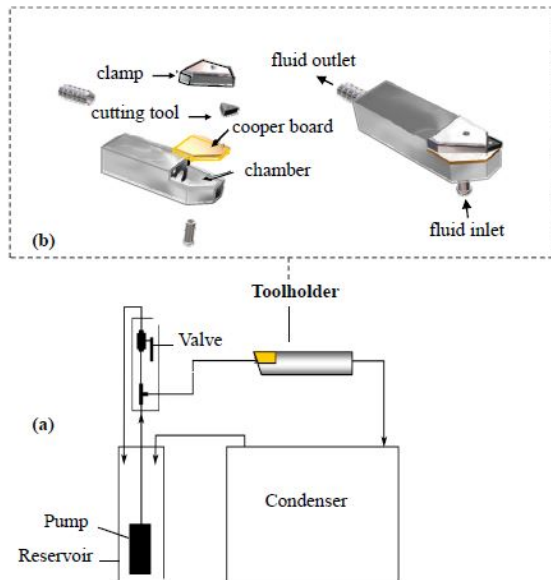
Typical scheme of cooling system (a) and internally cooled tool (b) [4].
